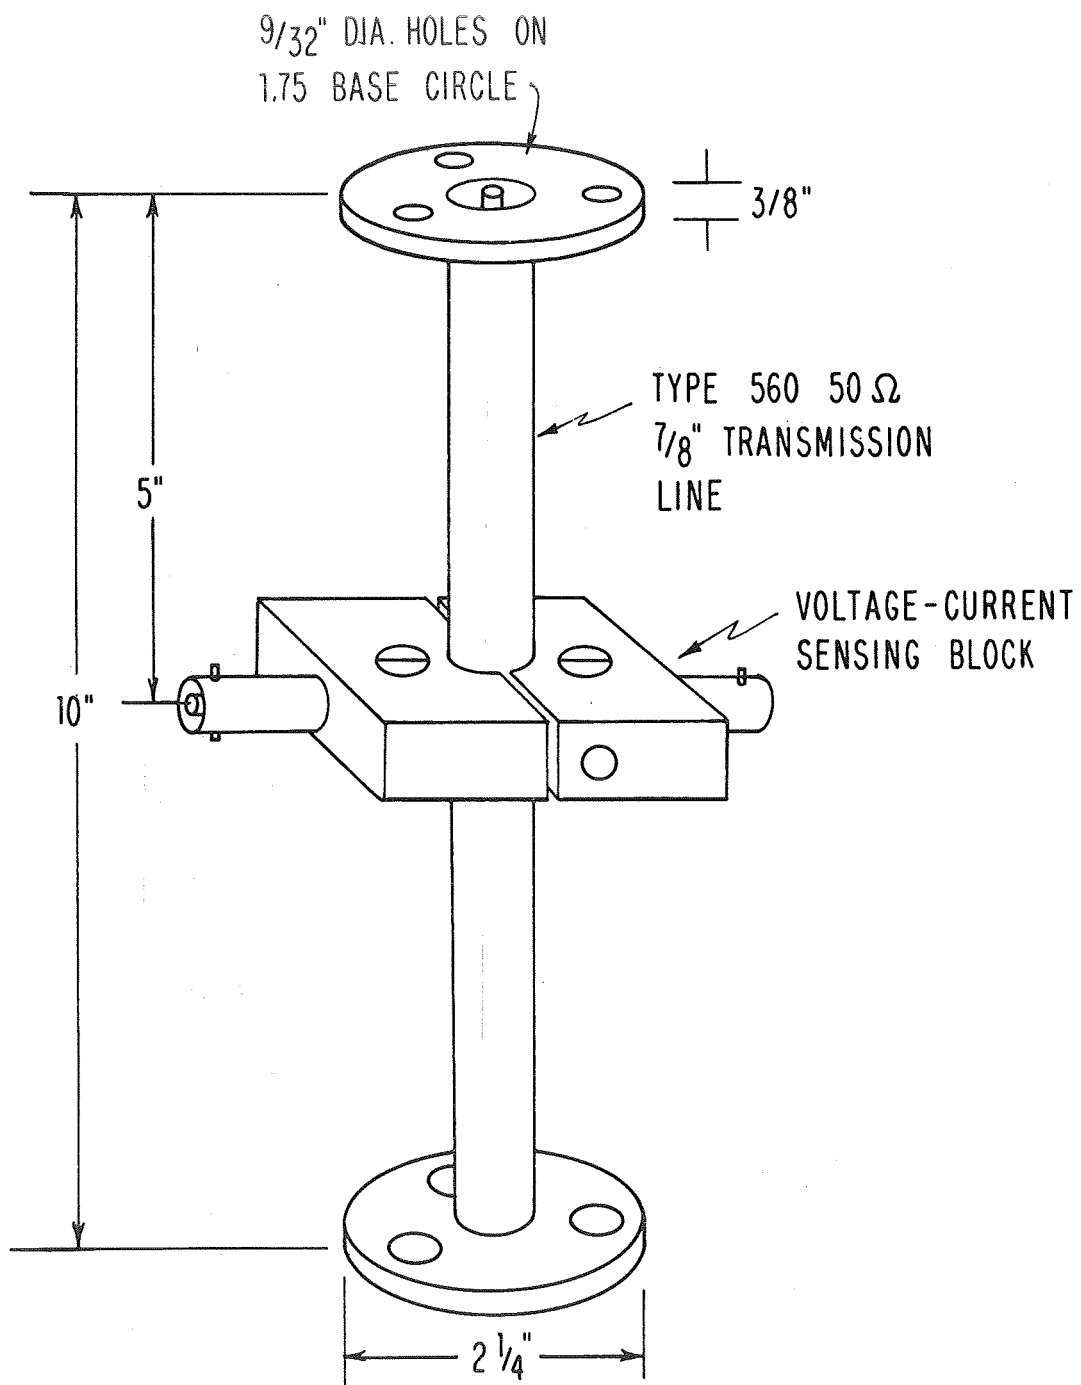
ADMITTANCE MEASUREMENT ASSEMBLY
